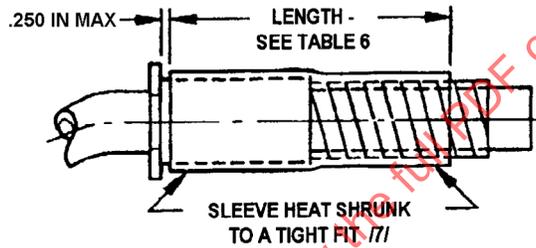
ABRASION SLEEVE ATTACHMENT
